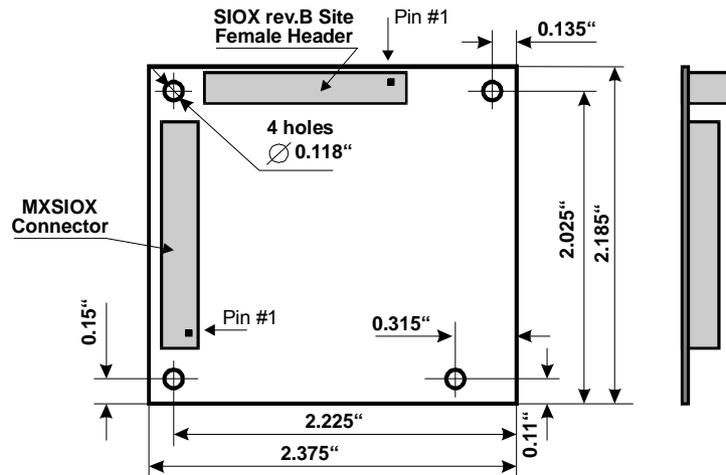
Physical dimensions of *T/SU-X1 SIOX rev.B* mini-extender.
